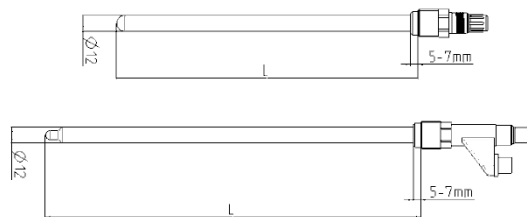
Sensor filled with gel (top), sensor filled with liquid (bottom)
